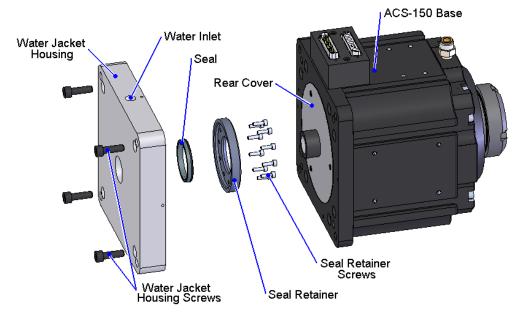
Exploded View of Water Jacket Housing Assembly
